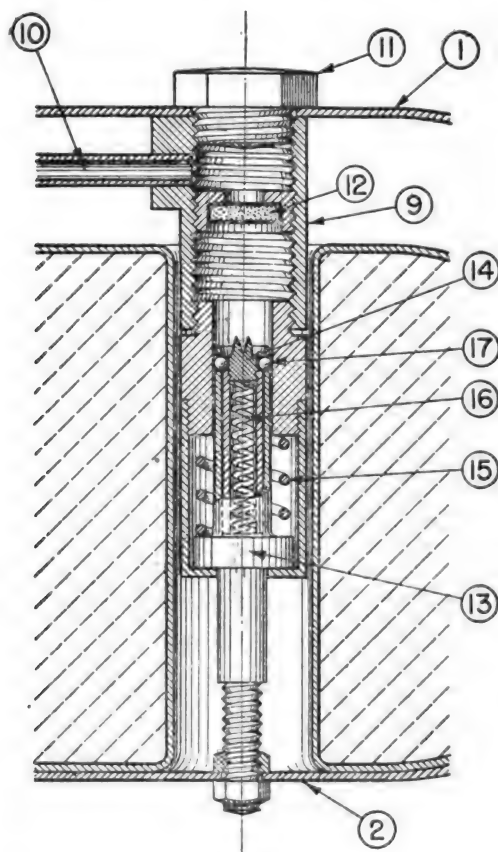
Details of push-type igniter in L. P. Z. mine.
